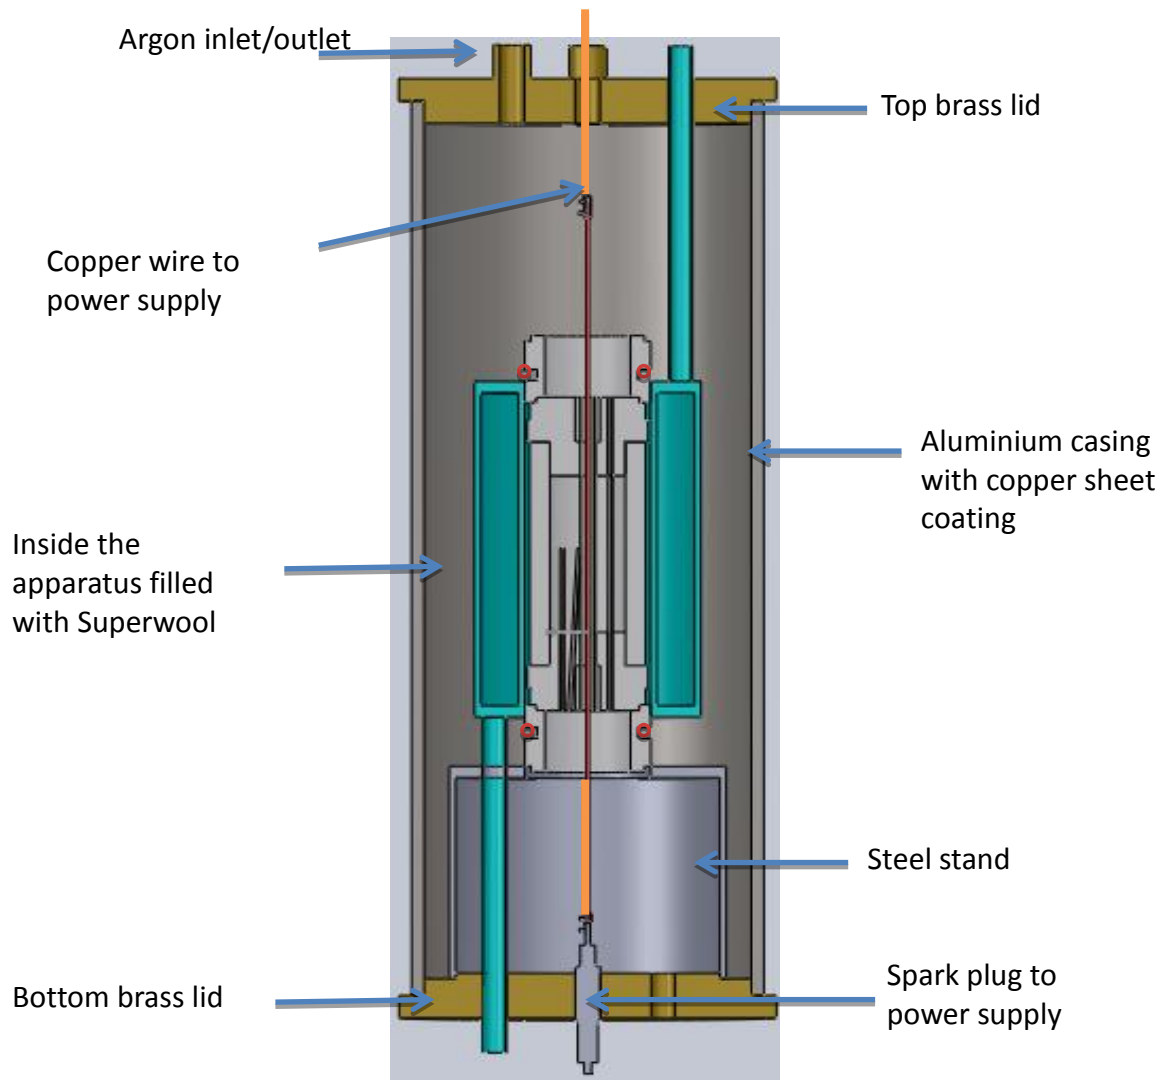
CAD drawing of the completed assembly of the radial heat flow apparatus
